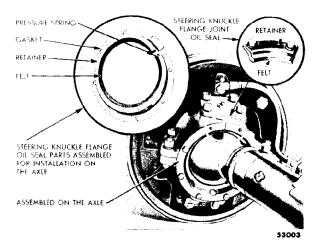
Steering Knuckle Flange Oil Seal Assembly
